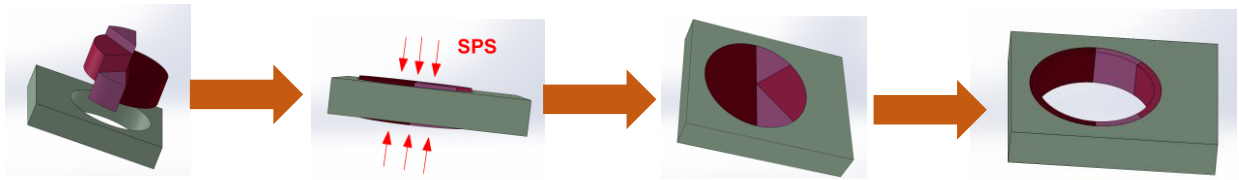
“Cake slices” processing route for thermal barrier rings with gradual composition: produce thermal barrier discs, cut disc slices, insert slices, SPS the assembled monoblock, drill a hole for the CuCrZr pipe.
